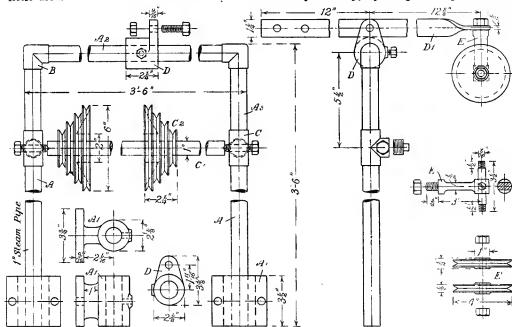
Components of overhead gear as illustrated in Fig. 42
